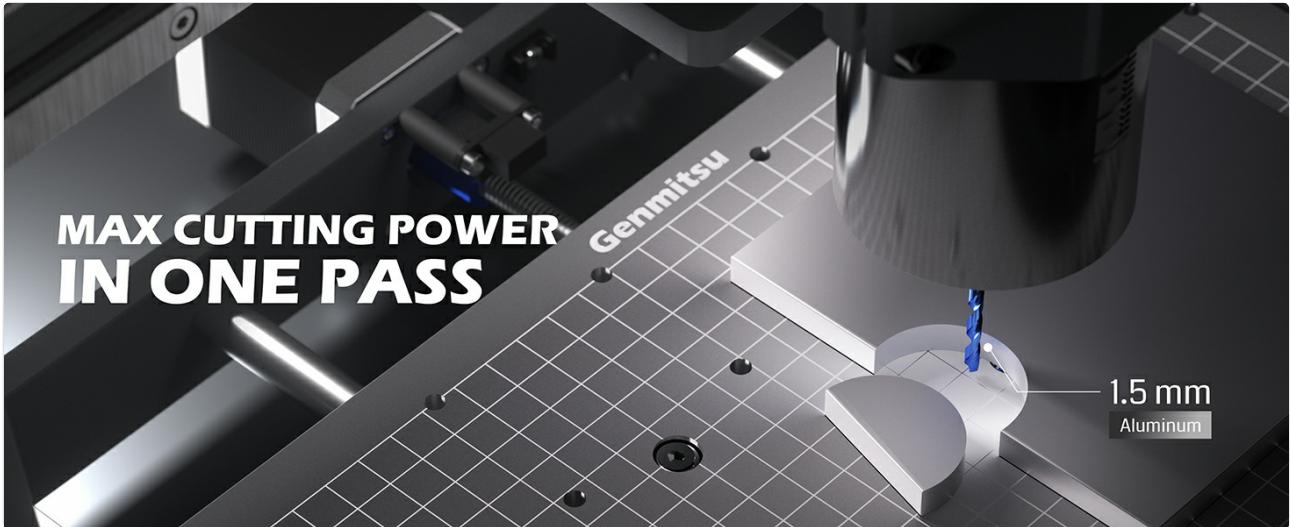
Illustration demonstrating the machine's capability for a 1.5mm deep cut in aluminum in a single pass.
